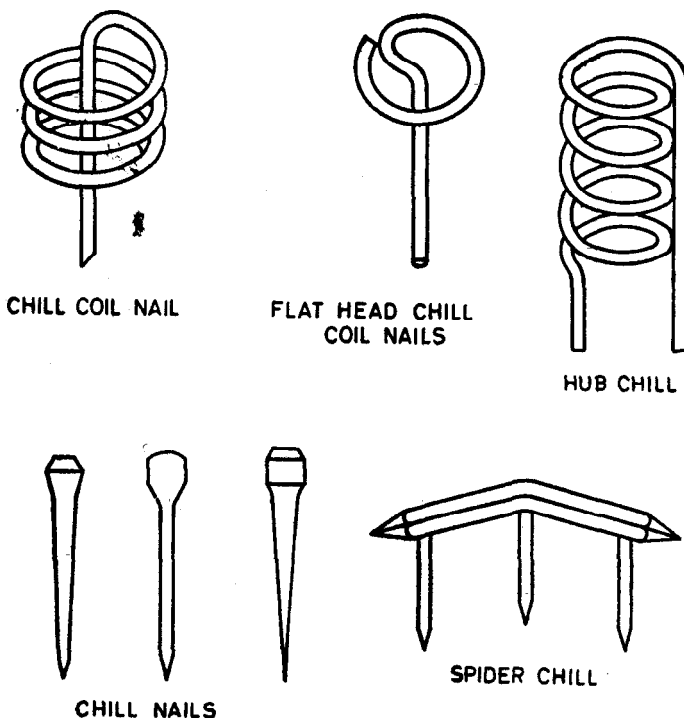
SOME TYPICAL SHAPES OF CHILL NAILS
